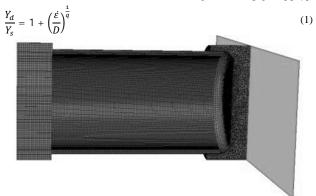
Sectioned tube and die when the striking projectile impact the tube in Abaqus
